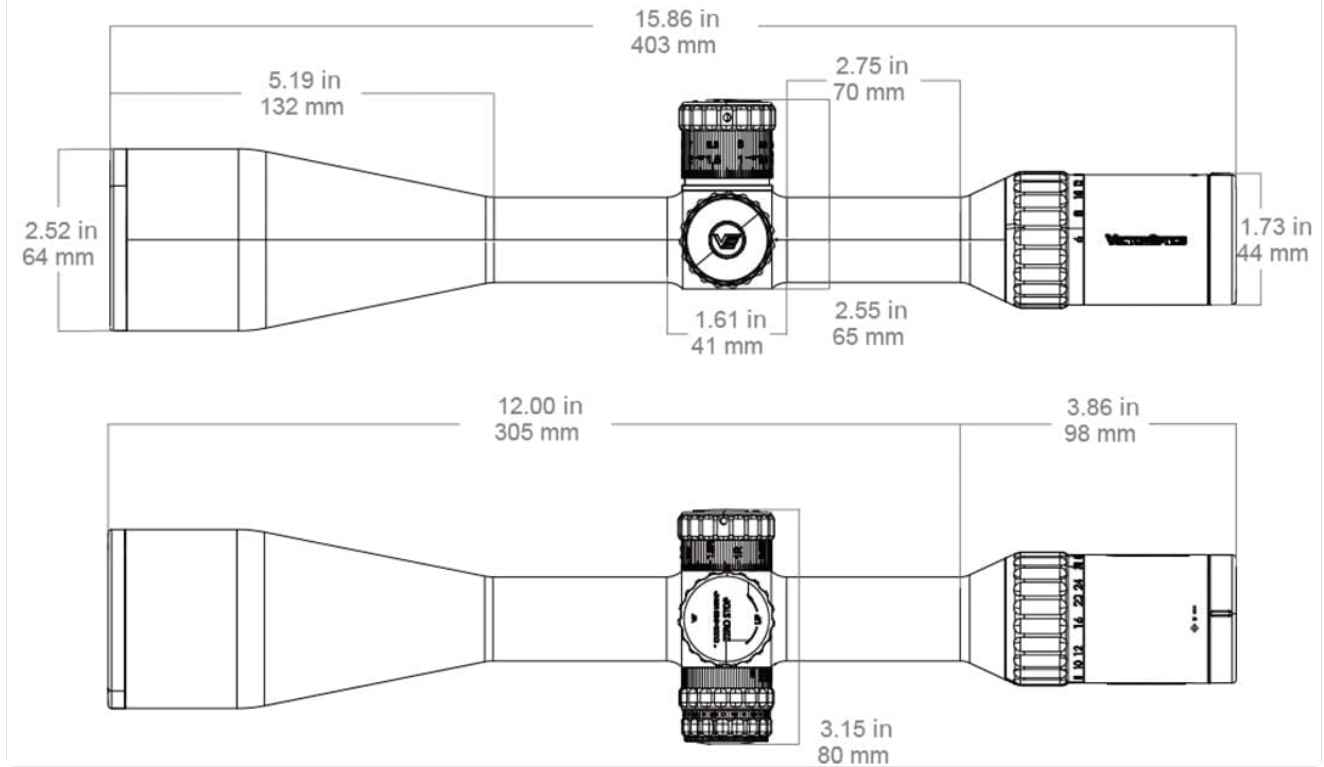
Technical drawing illustrating the precise dimensions of the riflescope in both millimeters and inches.
